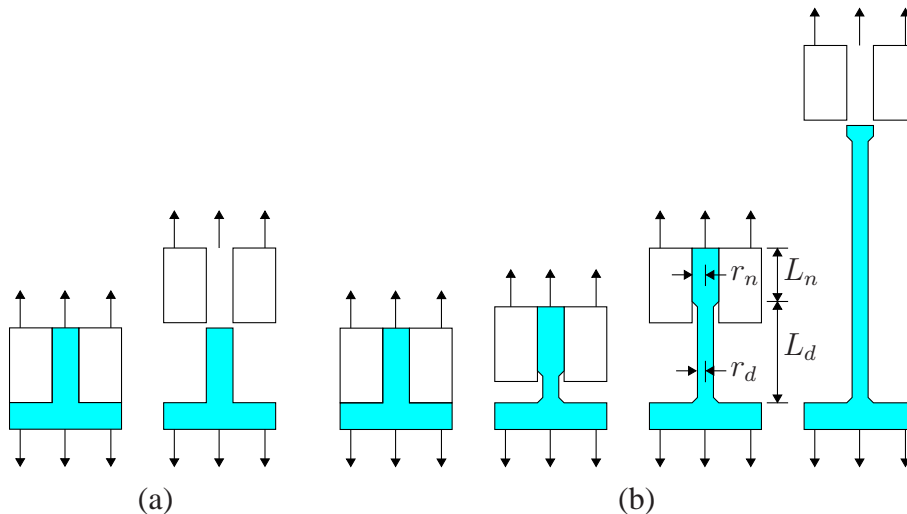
Illustration of possible fiber pulling scenarios. (a) Fiber is pulled out of the mold undeformed. (b) Fiber is necked until the drawing force and release force balance, allowing the fiber to pull out of the mold.
